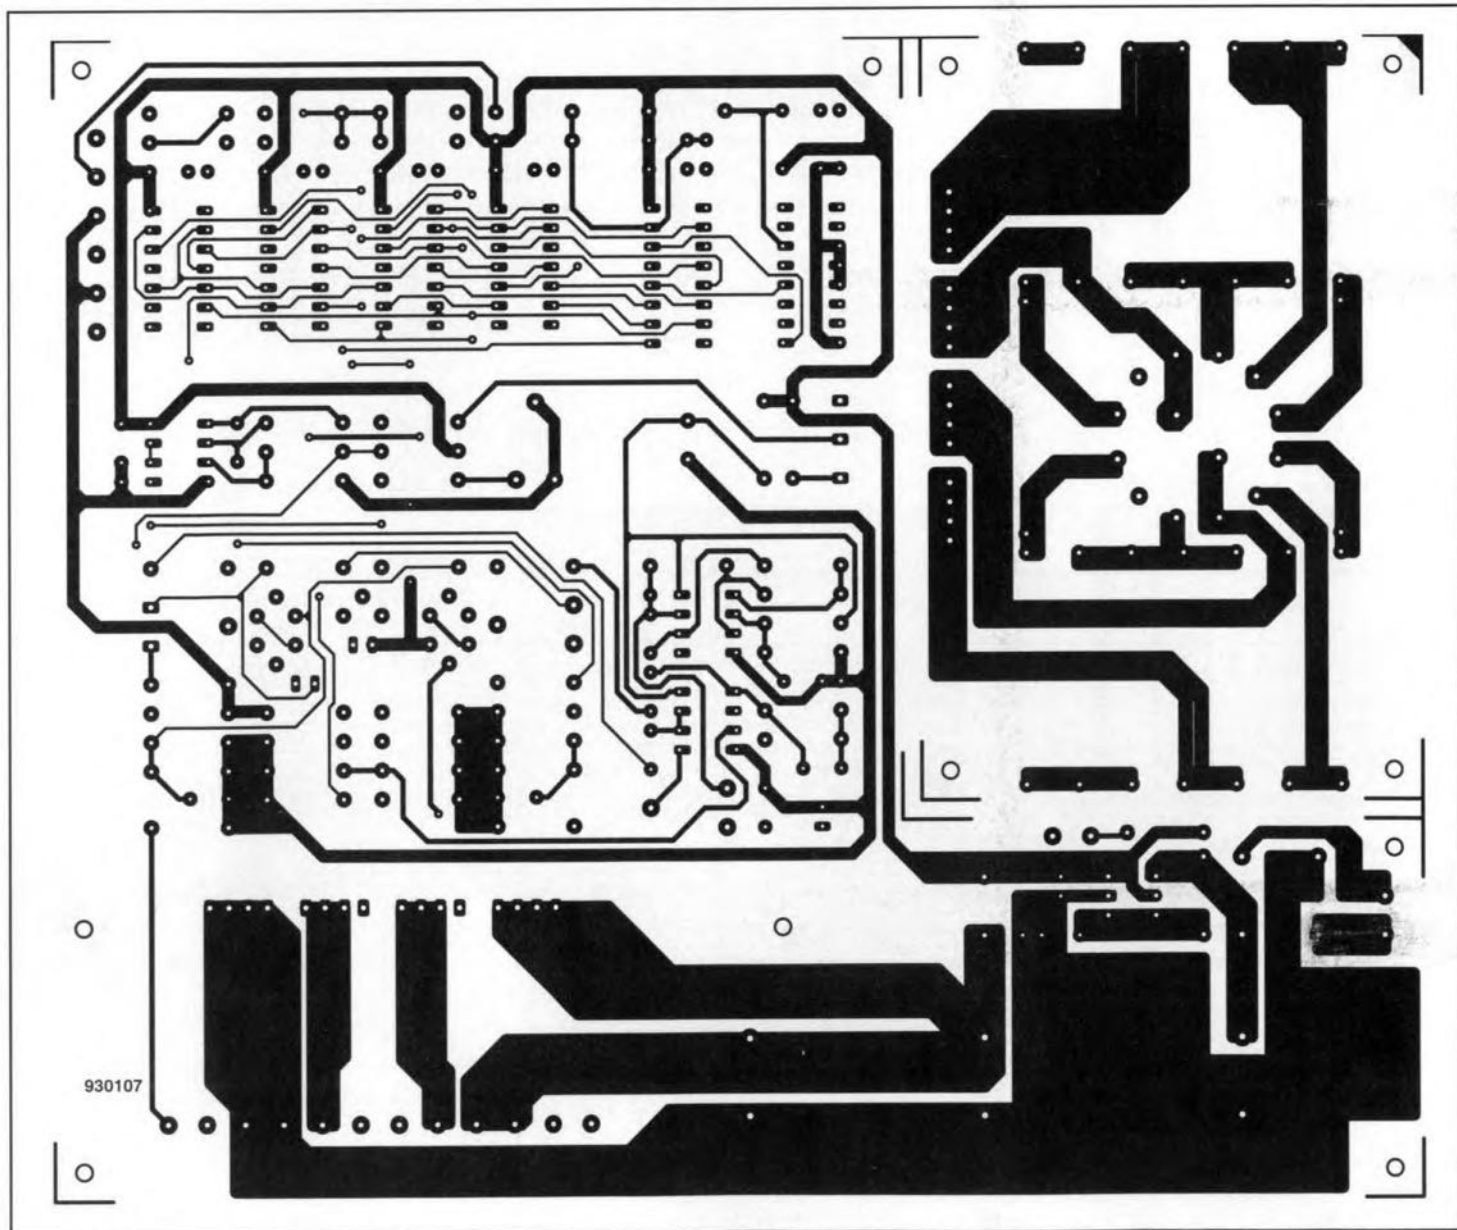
Copper side of the printed-circuit board for the power MOSFET tester. Component layout on previous page.
